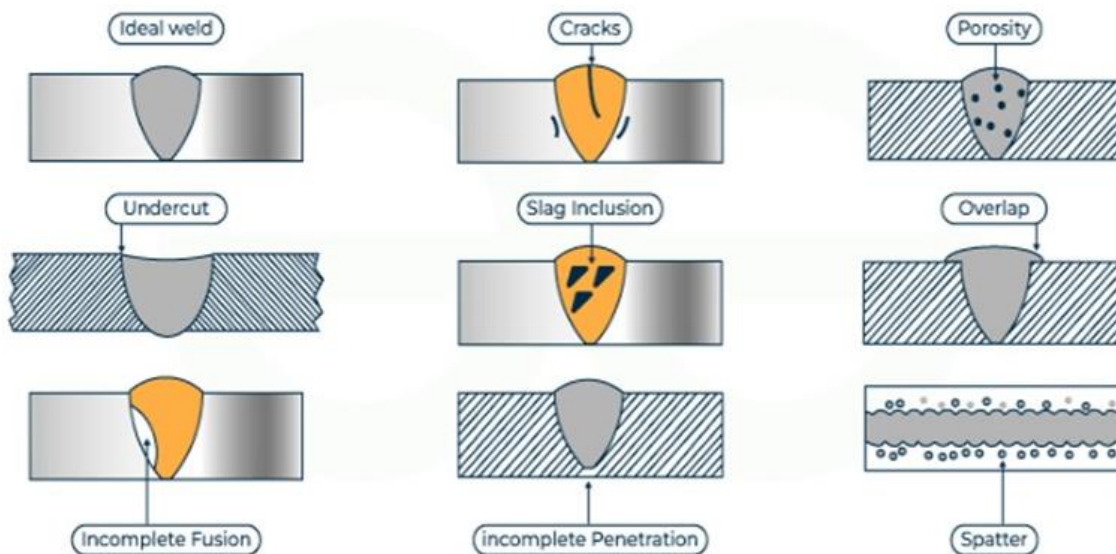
Cross-sections of welds containing typical defects [Madhvacharyula et al.,2022]
